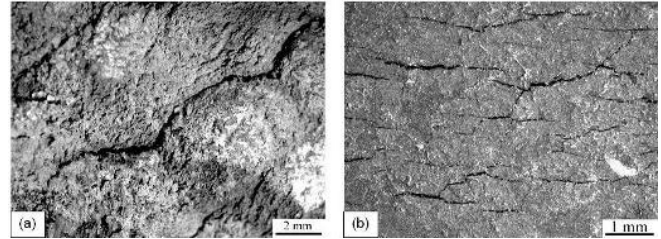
Low magnification stereoscopic photographs of the fracture surface (a) and the inner surface (b) of the failed U-bend pipe joint.
